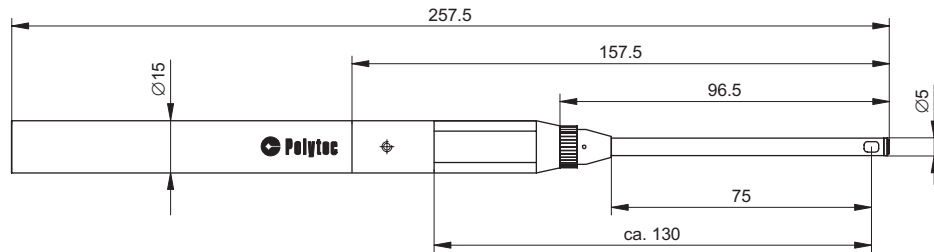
View of the side exit head OFV-C-102 (dimensions not specified are given in mm)
